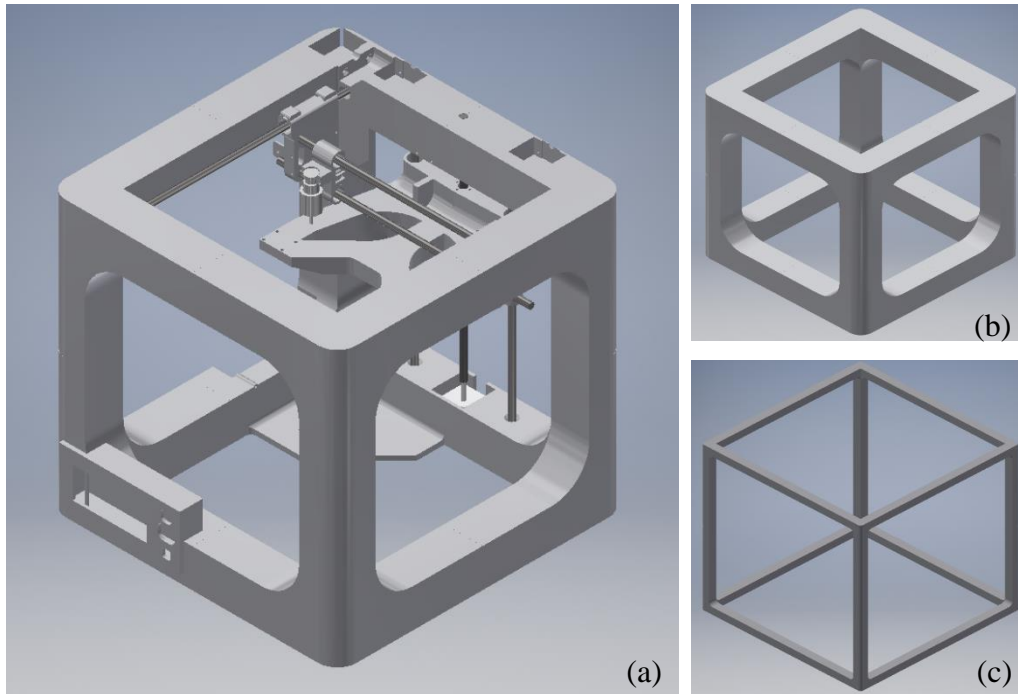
3D Printer frame assembly models for simulations a) Master assembly file b) Small (40x40 cm) frame c) Large (110x110 cm) frame
